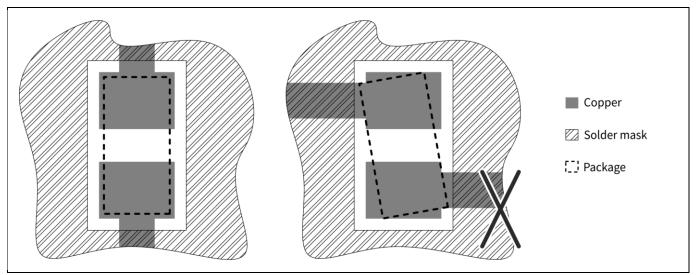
Examples of a typical NSMD pad design for 2-pin WLL package (left) and of a non-prefered perpendicular arrangement of conductor tracks (right).
